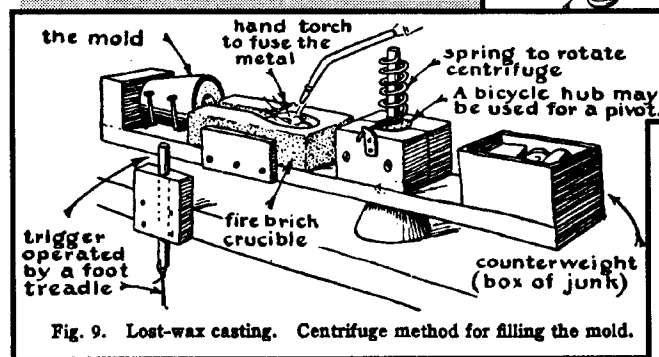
Lost-wax casting. Centrifuge method for filling the mold.
